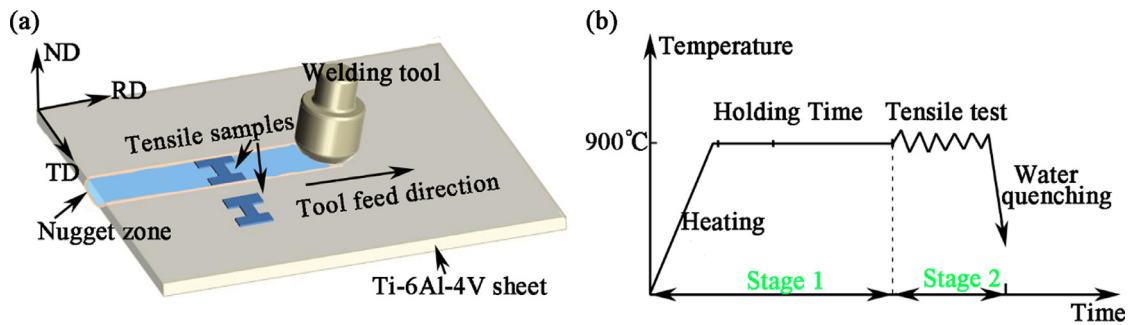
(a) Schematic of friction stir welding process and sample positions, (b) heating process during superplastic tensile test.
